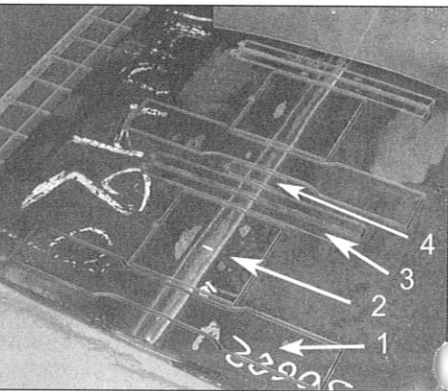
Different types of weld test specimens taken out of one procedure test:
